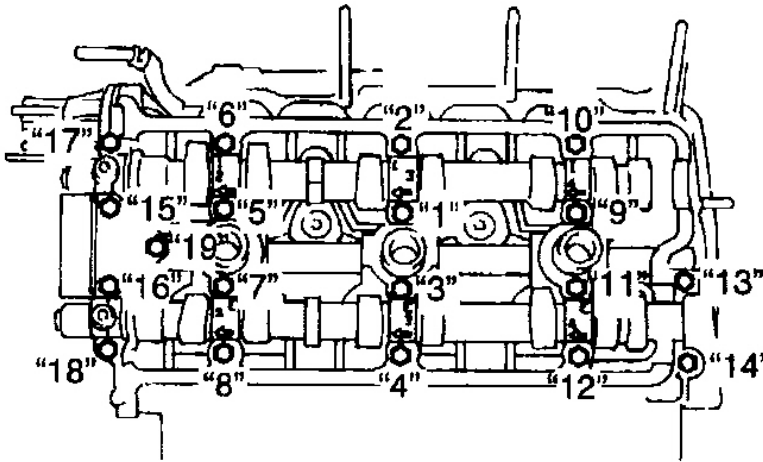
Checking Position Of LH Bank Camshaft Housings With Embossed Marks
